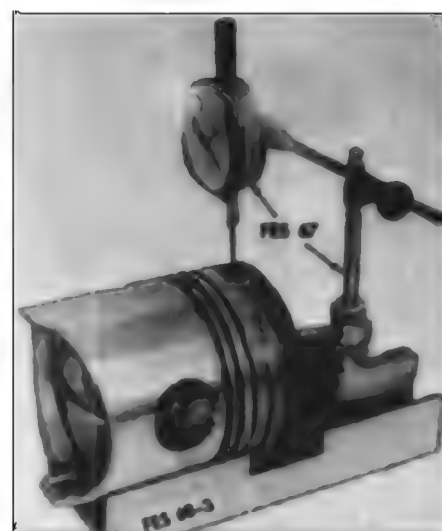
View showing full keystone ring fit being checked. Ring drop should be 0.002-0.015 inch. Refer to text.
